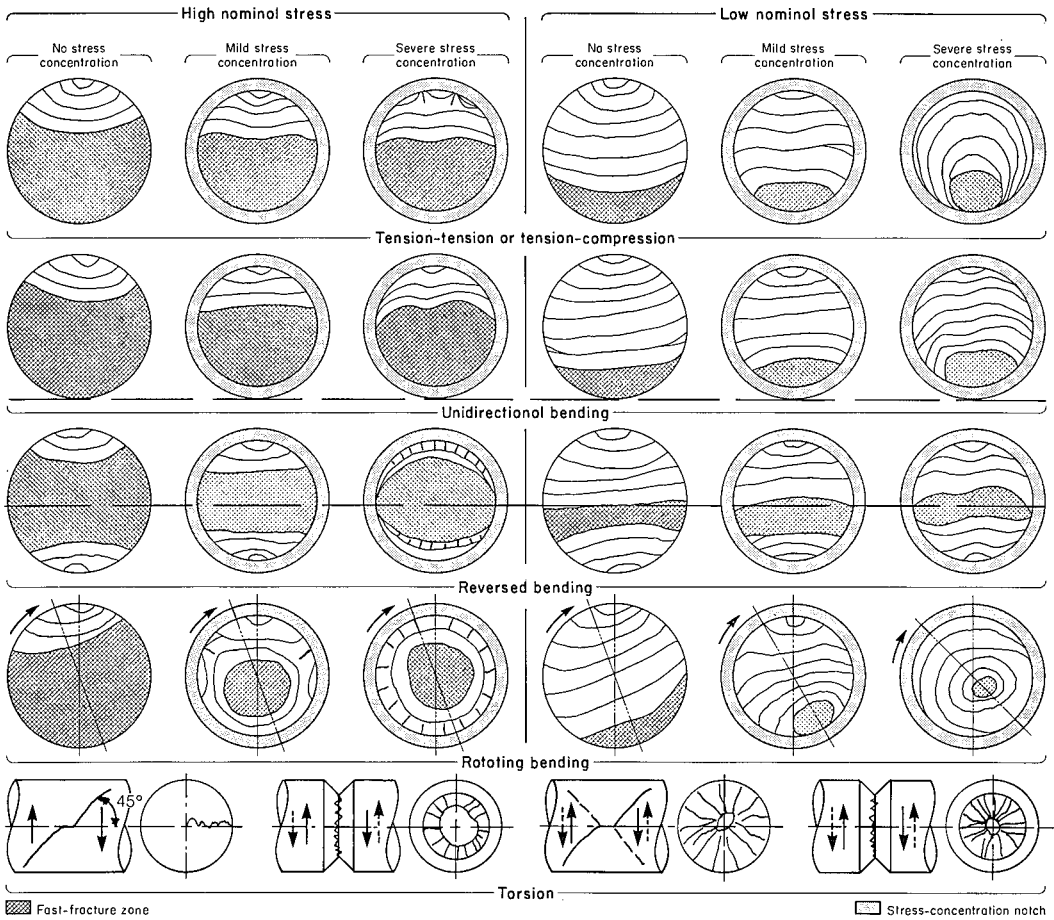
Schematic representation of fatigue-fracture surface marks produced in smooth and notched cylindrical components under various loading conditions. Note that the final rupture zones (fast-fracture zones) on the left half of the figure, which had a high nominal stress, are considerably larger than the corresponding final rupture zones on the right half, which had low nominal stresses. The individual lines in the sketches represent the general configuration of the progression of the fatigue crack, as recorded by possible submicroscopic striations and macroscopic beachmarks. The long dashed lines in reverse and unidirectional bending indicate the bending axes. Also note the radial ratchet marks between origins of the high nominal stress fractures. In the torsional fatigue fractures (bottom row) note that unidirectional fatigue (left) is at an approximate 45° angle to the shaft axis, while reversed torsional fatigue of a cylindrical shaft (second from right) has an X-shaped pattern with the origin in either the longitudinal or the transverse direction. Torsional fatigue cracks in stress concentrations tend to be very rough and jagged because of many 45° cracks. Modified from Ref 4
